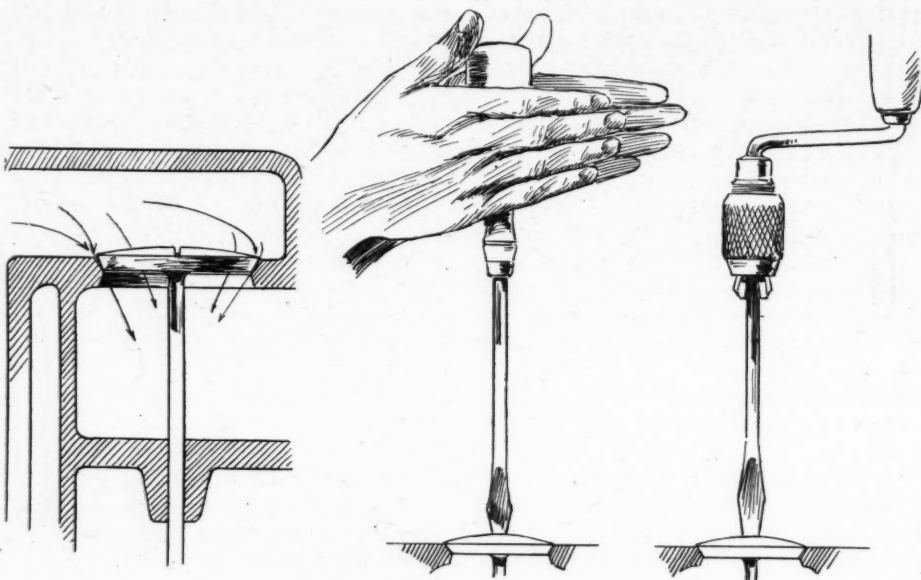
The view at the left is to show how compression leaks through valves which are leaky. The other two views show two tools to use in grinding valves, and incidentally a method of holding the screwdriver in the hands
